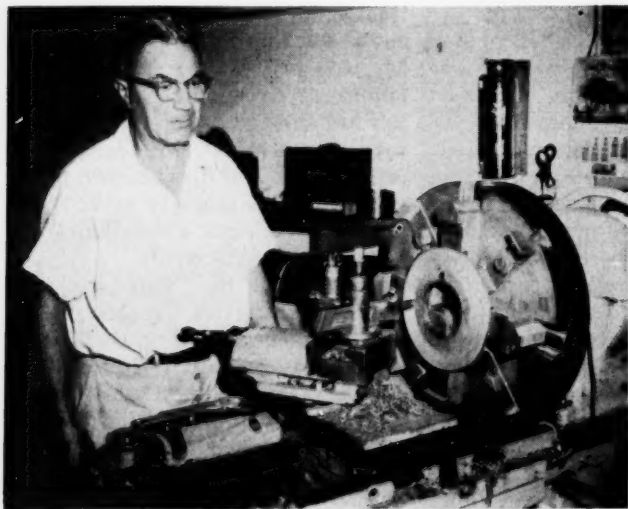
Vincent Guglietti — once retired, but now back at his trade — faces a forging in a Lodge & Shipley lathe.
